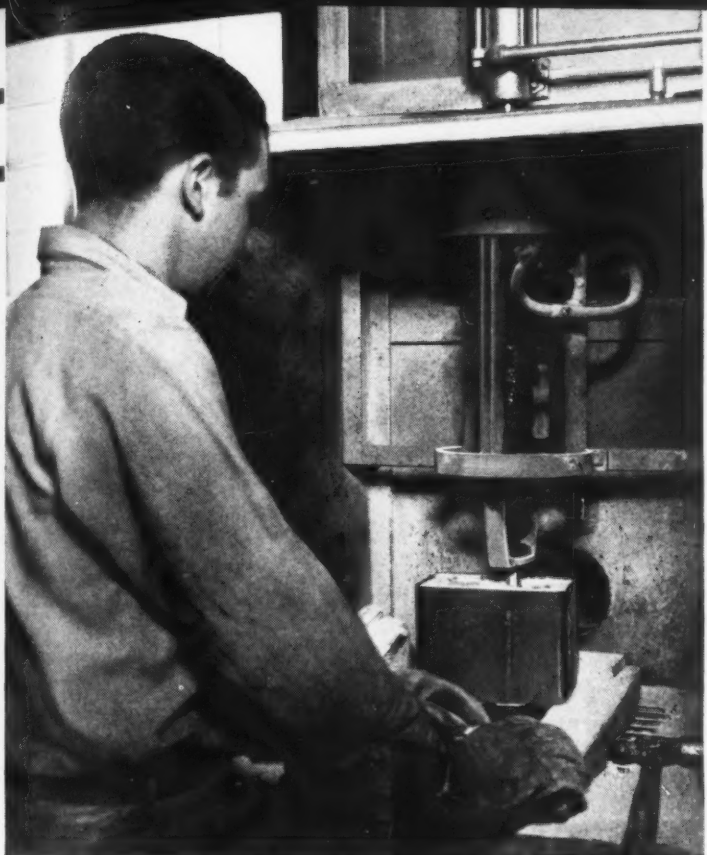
A pneumatic hammer is used to break the hardened secondary investment in order to remove castings from mold
